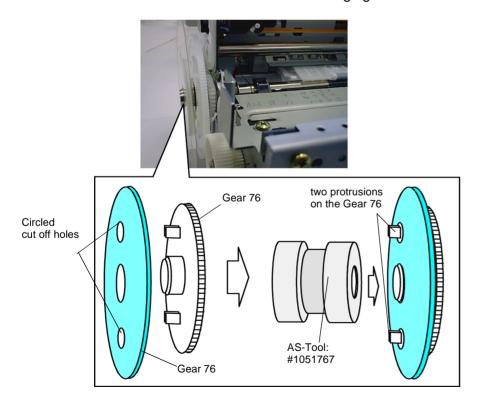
Stick the PF Loop scale unit on Gear 76
